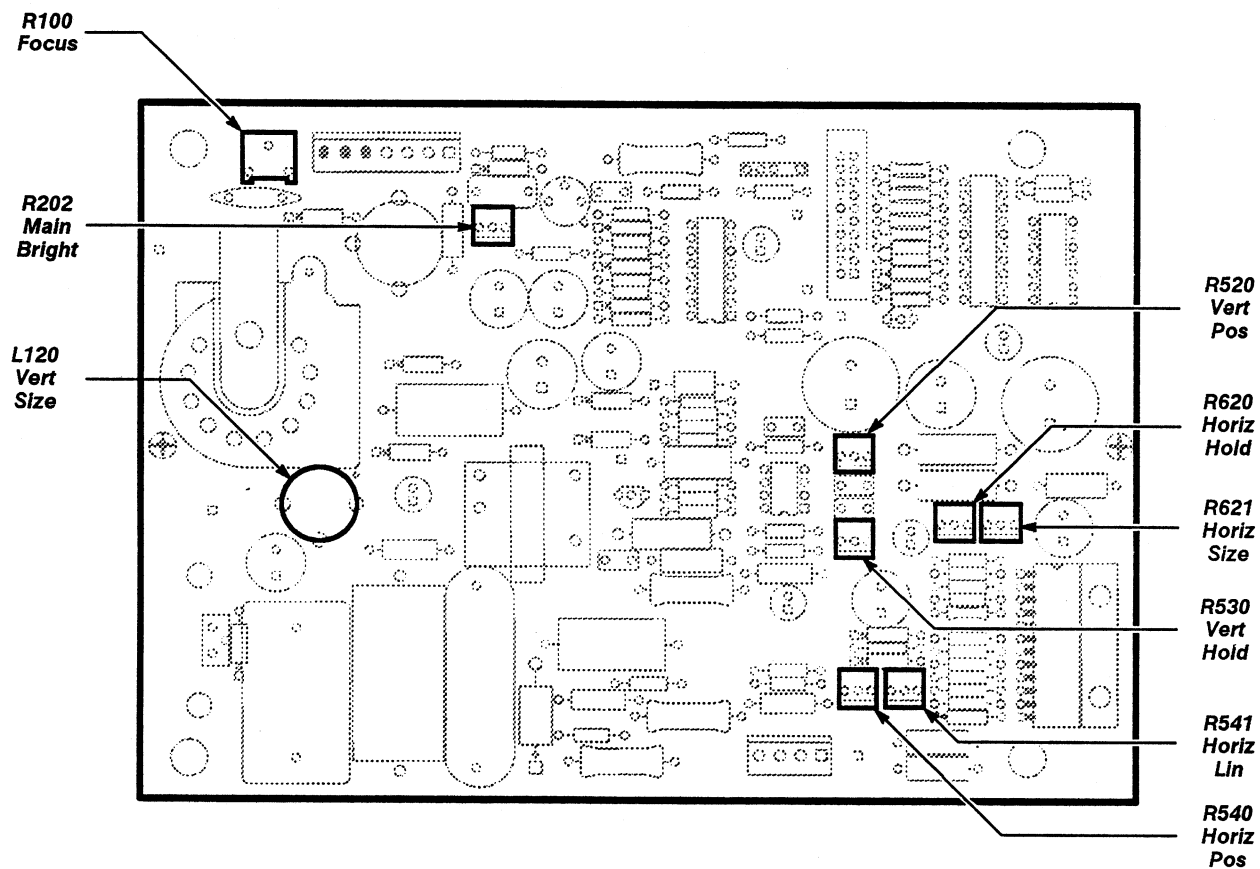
A8 CRT Driver Board Adjustment Locations
